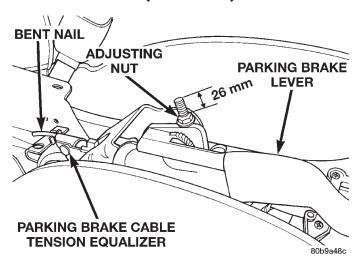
Parking Brake Adjustment (Rear Disc Brakes)
